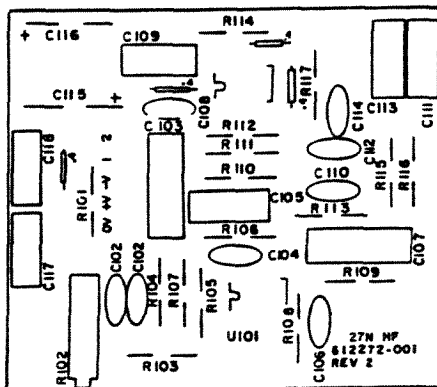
Typical Circuit Board Layout - Harmonic Filter Module
